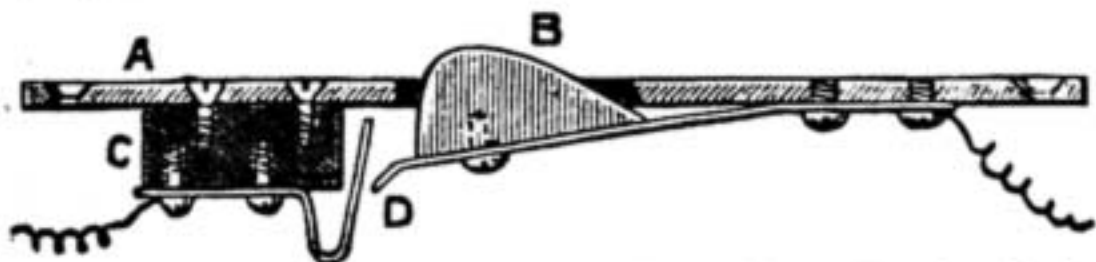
Bellars' Improved Burglar Contact in Section—A, Brass Plate; B, Brass Tongue; C, Ebonite or Hardwood Block; D, Rubbing Spring.
